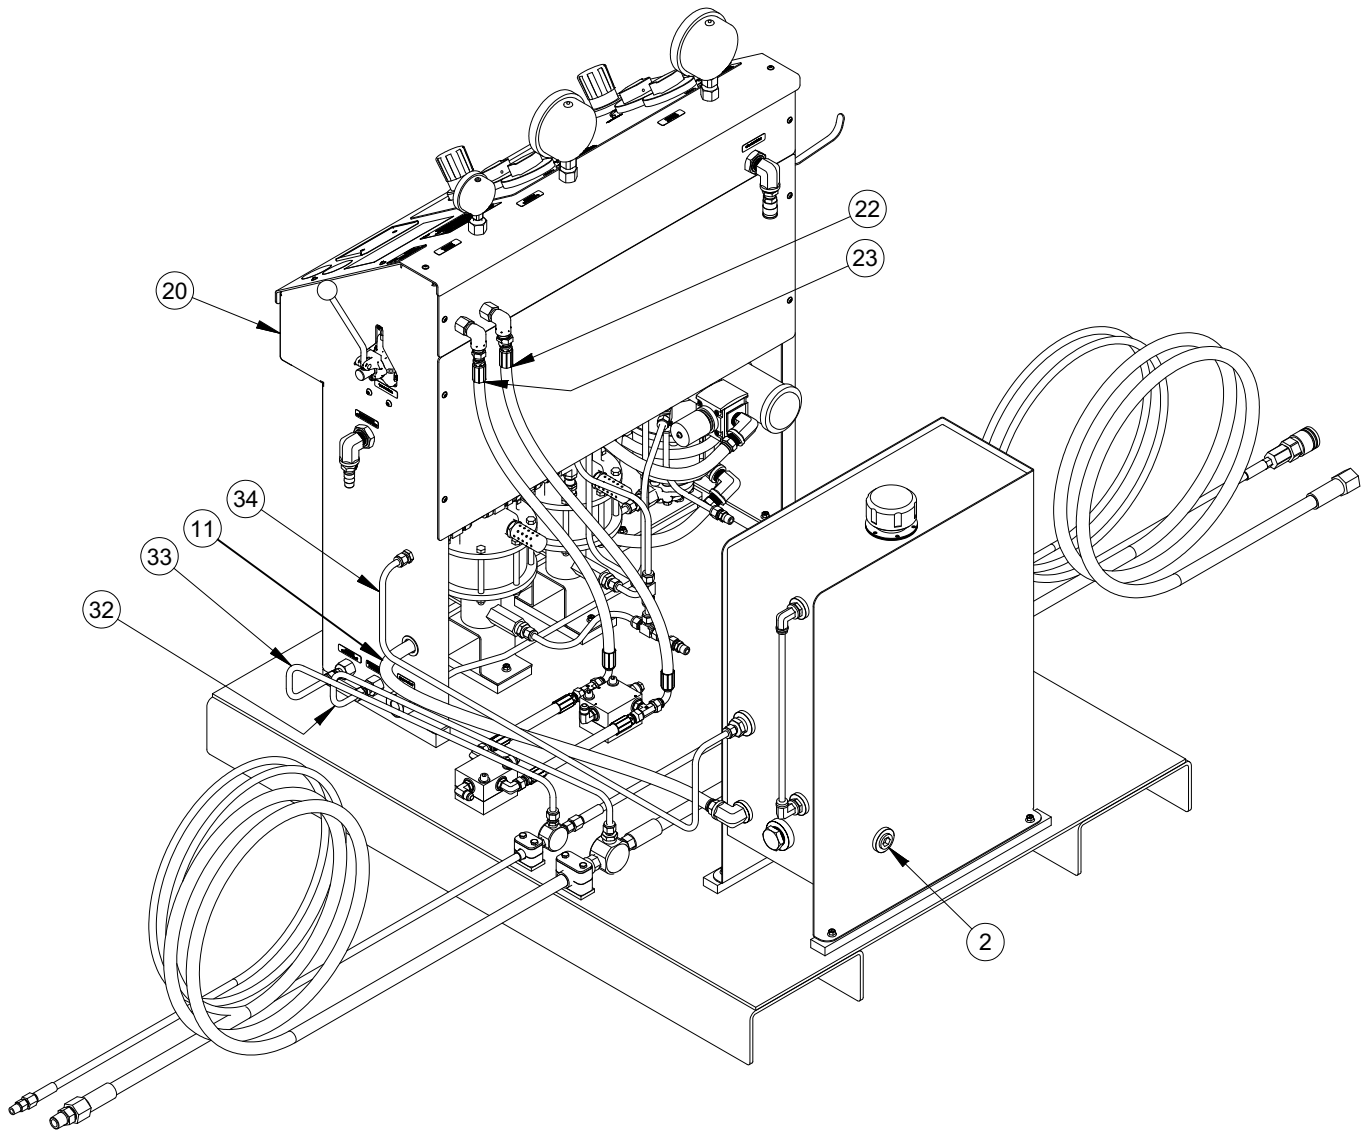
UFV-24-300T REAR CONSOLE ASSEMBLY (P/N 91681)
